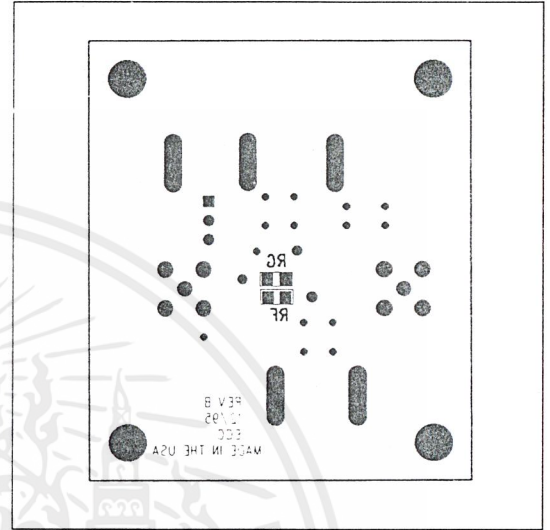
MAX477 EV Kit Component Placement Guide—Solder Side
